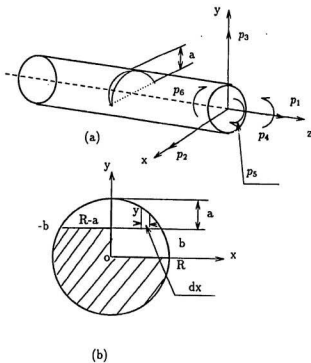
(a) A cracked shaft element in general loading; (b) the crack section of the shaft.
